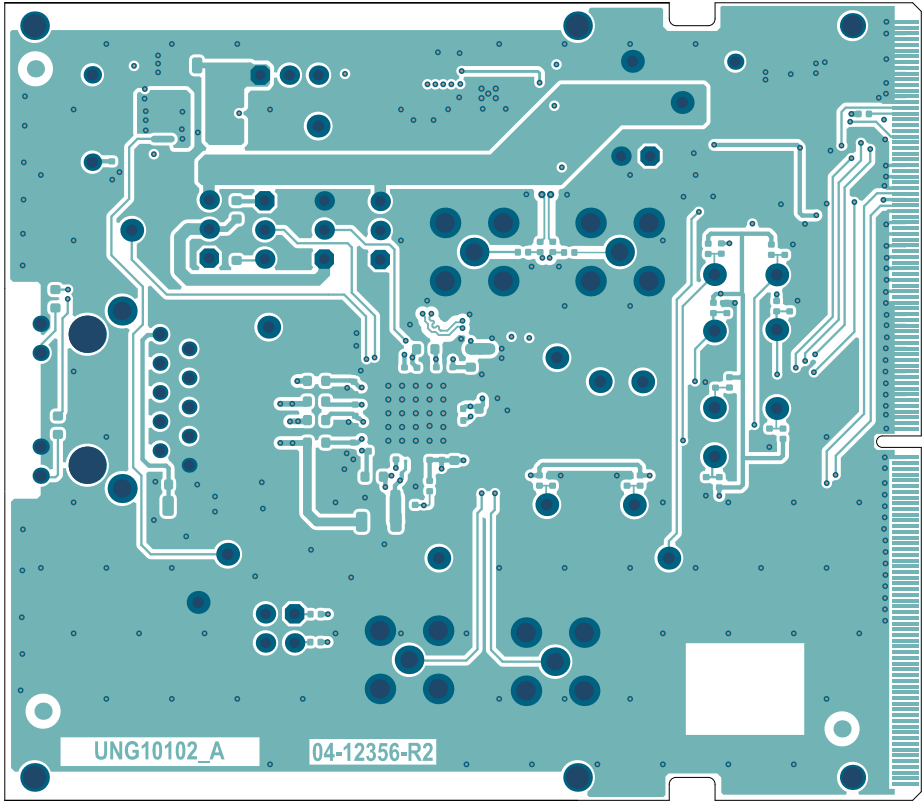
LAN8842 EDS2 DAUGHTER CARD BOTTOM COPPER AND SILK
